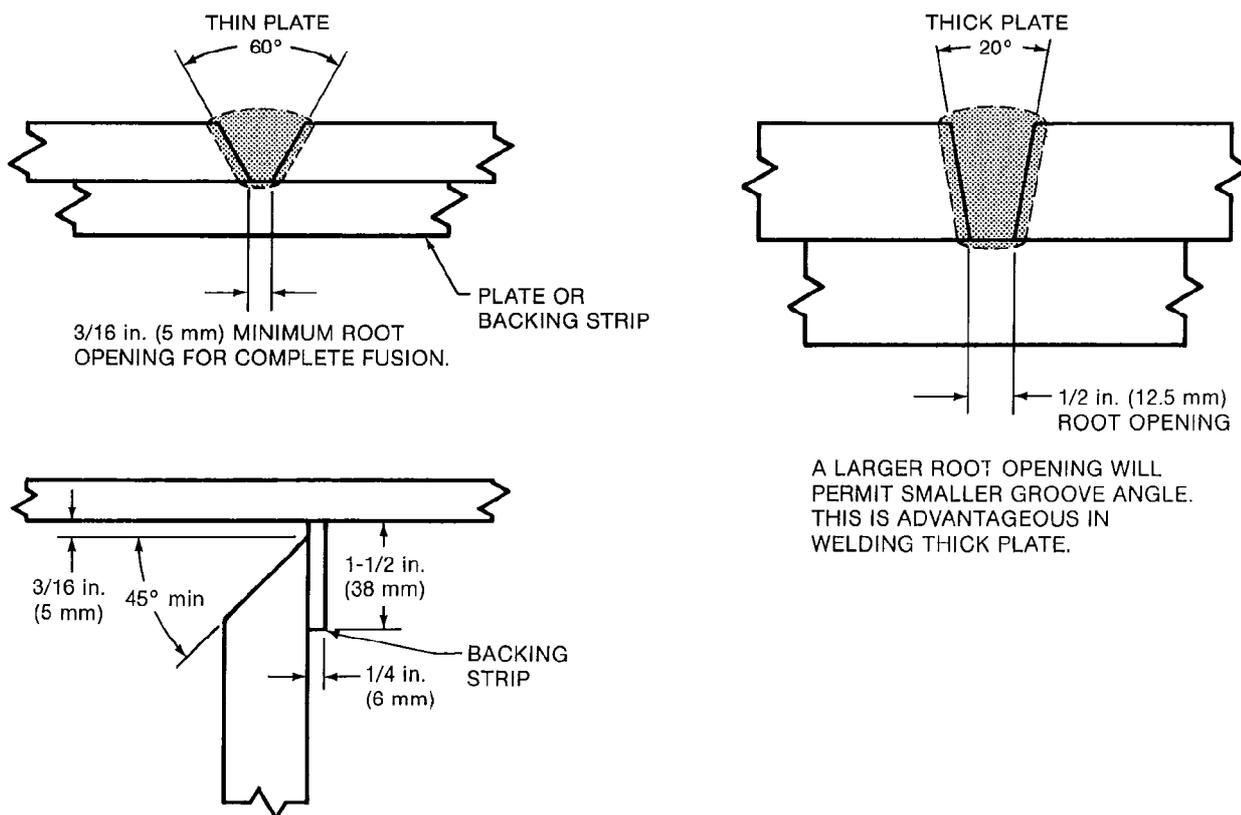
Typical Weld Details for Welding From One Side Only, Permanent Backing
